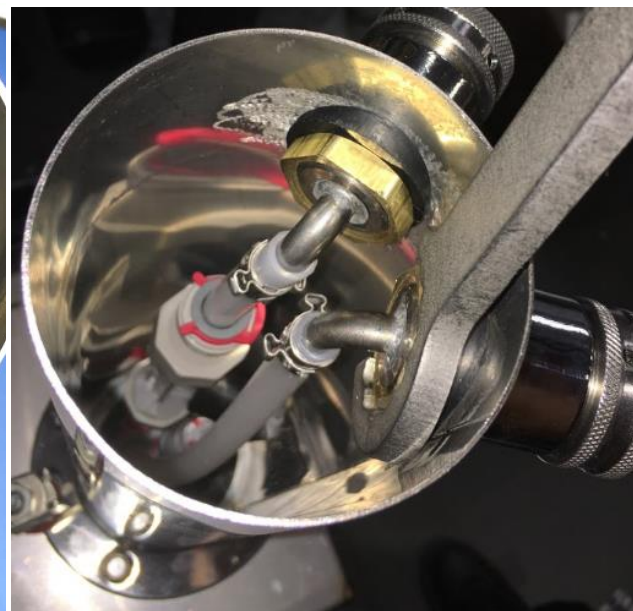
Elbow Shank Lock Nut tightened with Flare Wrench.
